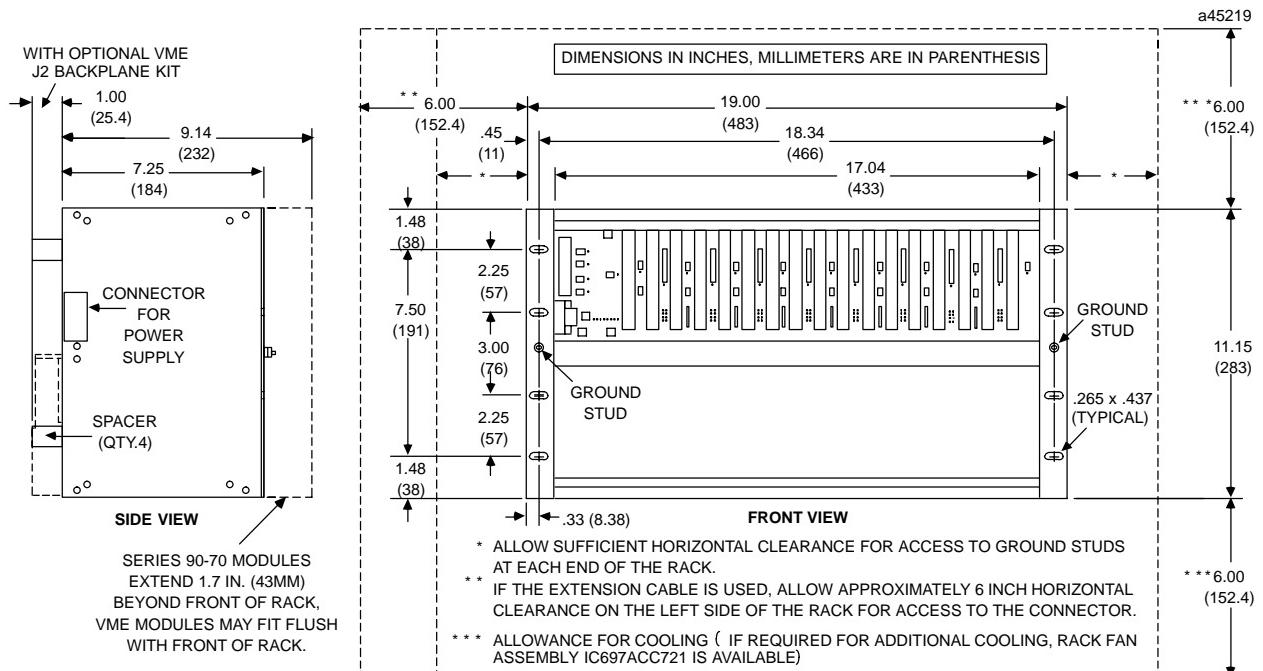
VME Integrator Rack Dimensions for Front (Rack) Mount Installation
